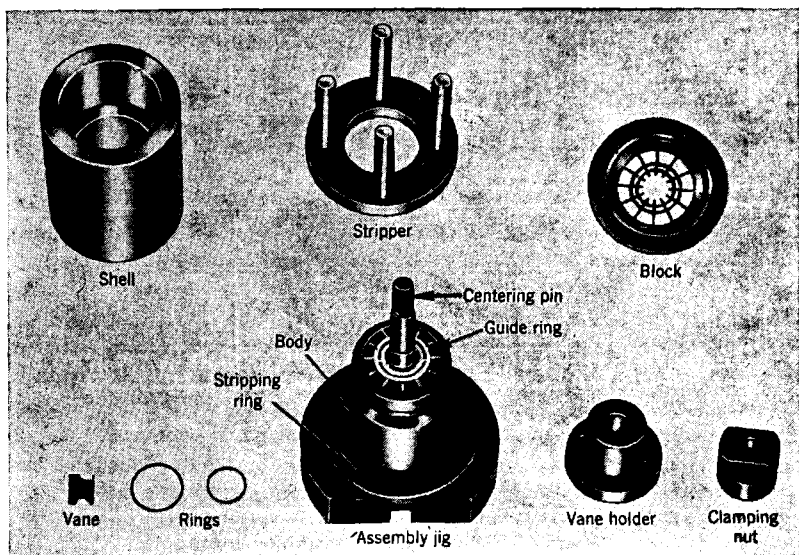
2J42 anode-block parts, assembly jig, and finished anode block.
